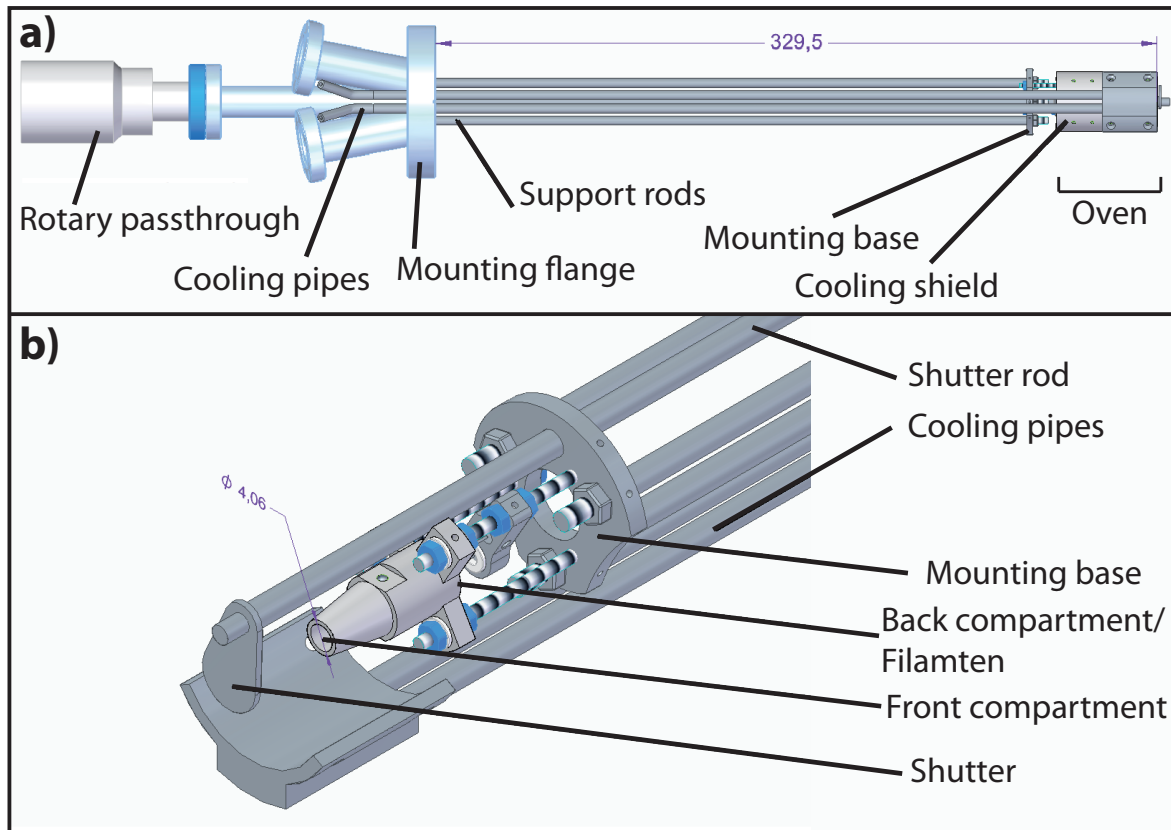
Technical drawing of the Ag evaporator. a) Top view of the whole evaporator. On the right-hand side is the oven (see panel b) and its cooling shield. It is mounted on a DN63 mounting flange via 3 metal rods. b) Side view onto the front of the evaporator. It shows the crucible that is mounted on the mounting base. The front compartment of the crucible contains the Ag and the shutter in front of it can be used to interrupt the atom beam. A 100 W filament in the back compartment is used to heat the entire crucible. The rods that are colored with a striation are threaded. Both drawings were taken from ref. [235]
